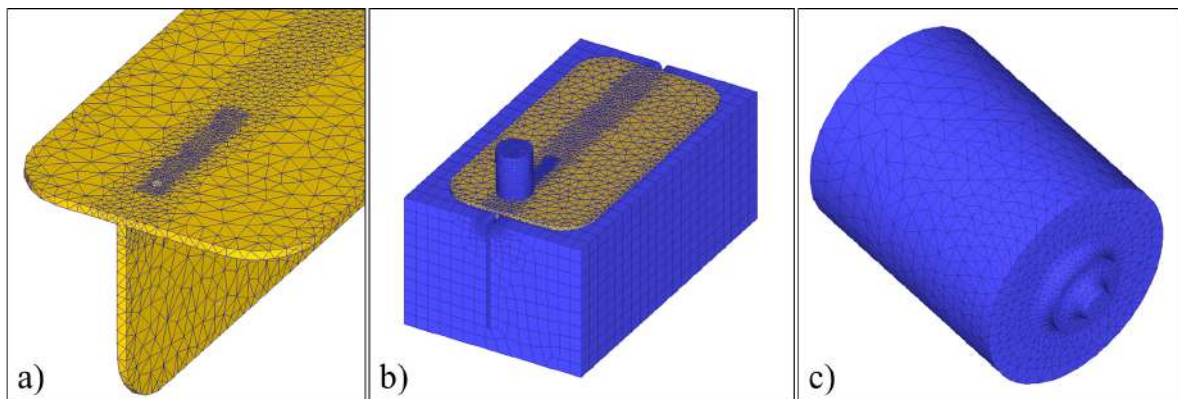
The FEM model for FSW process during the plunge phase: mesh of (a) the workpiece, (b) the assembly and (c) the tool
